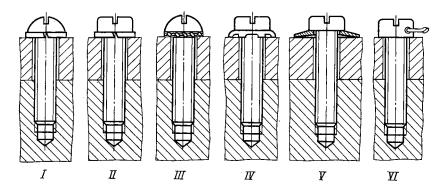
Locking round and cheese head machine screws I, II—by spring washers; III, IV—by tooth lock washers; V—by Belleville spring washer; VI—by wire binding
